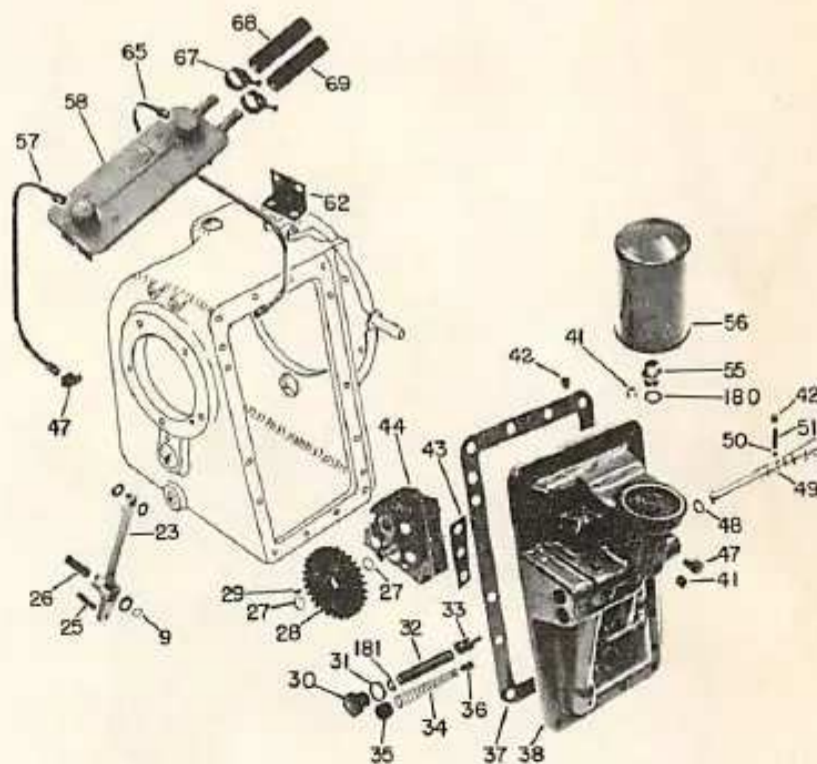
Exploded view of the early Hydra-Power drive cover showing component parts. Later cover assemblies are similar.
